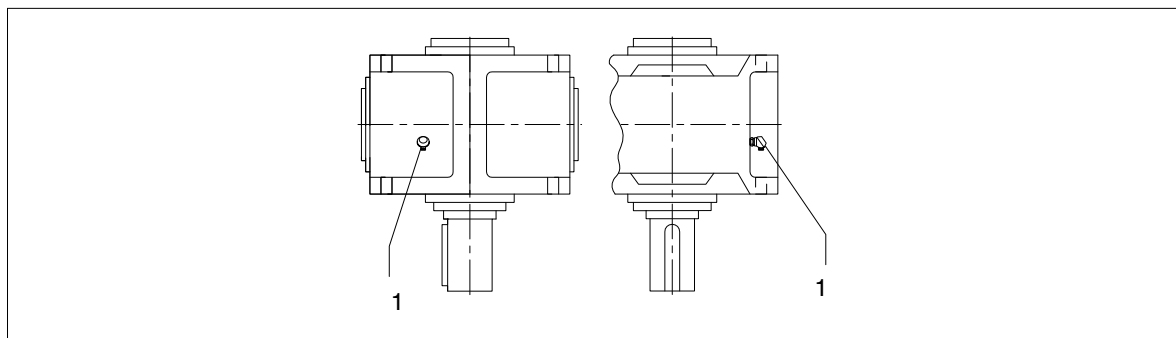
Oil-temperature measurement on gear unit of types H..V and B..V
